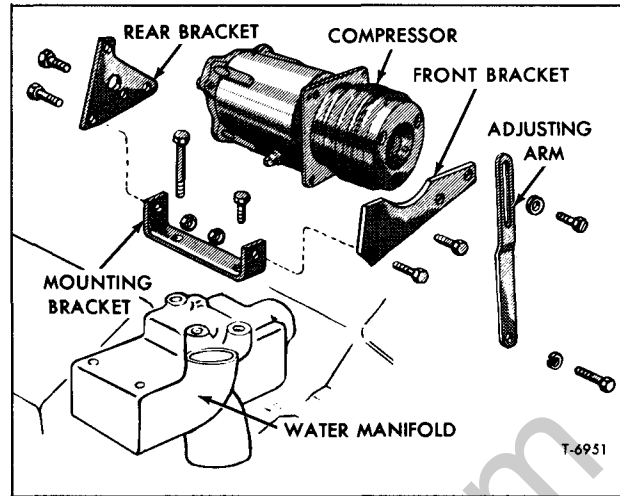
Compressor Mounting (V8 Alum. Tilt Cab Model)
